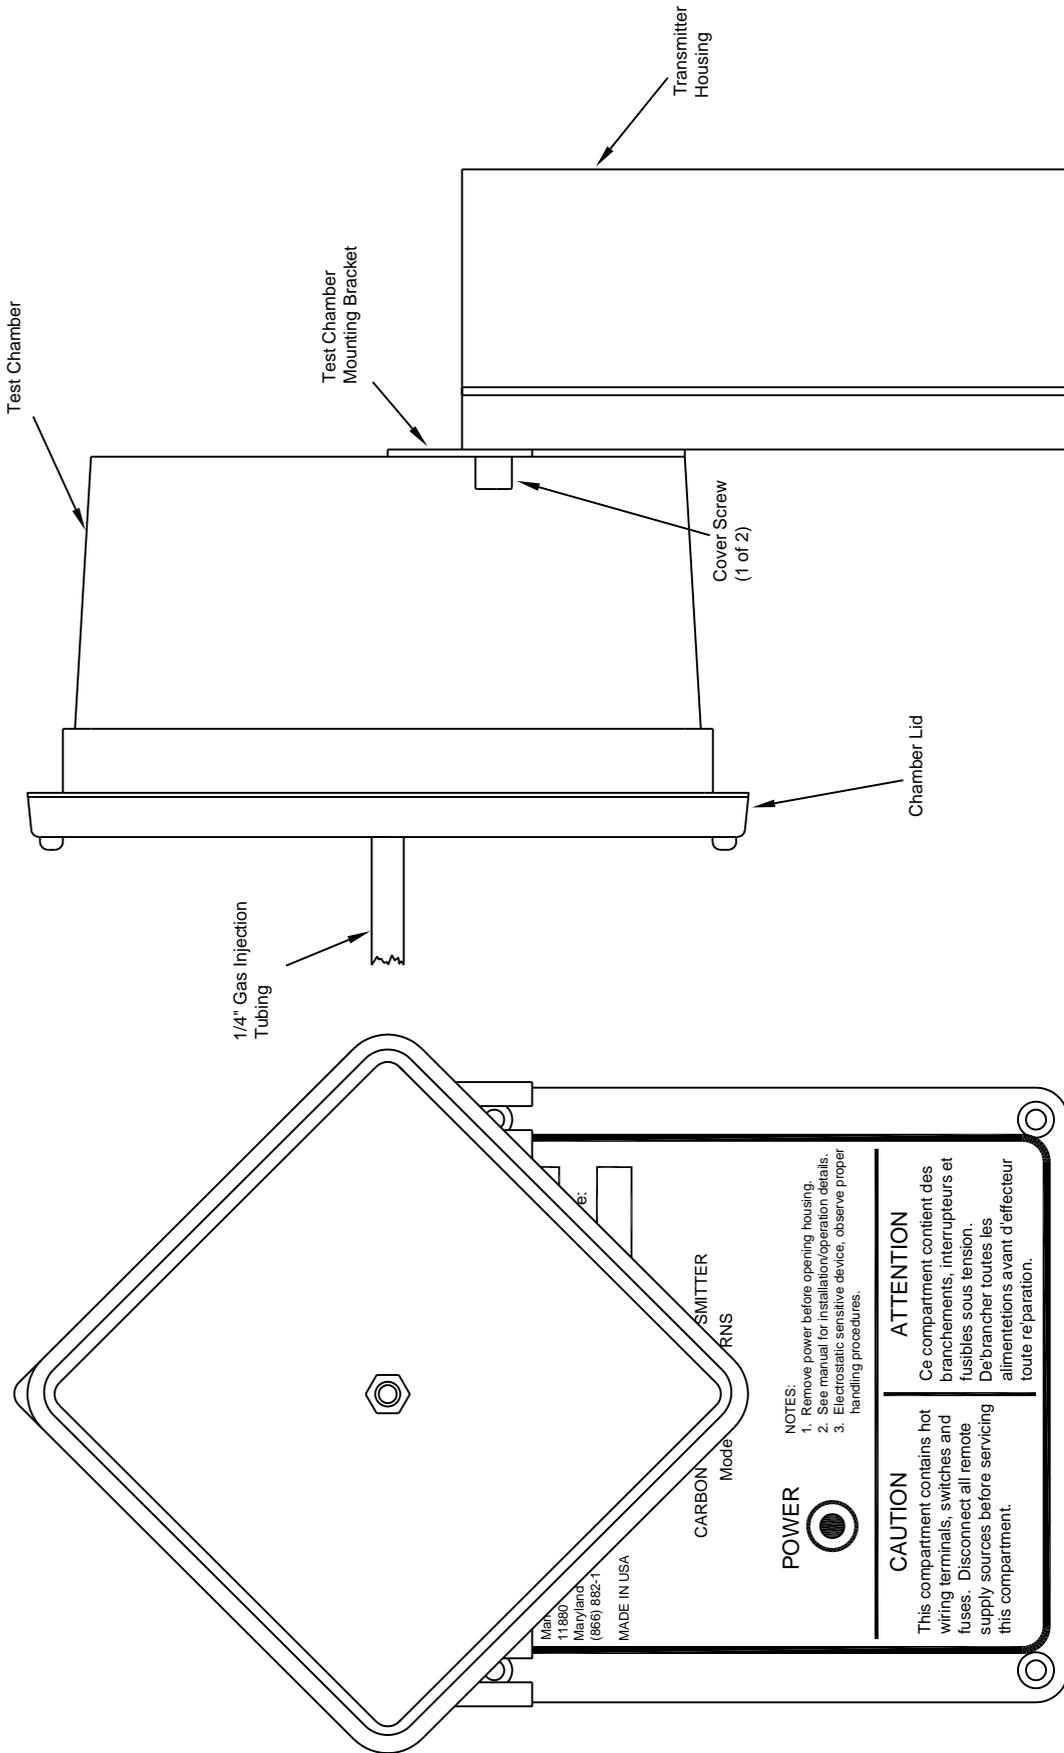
View of test gas chamber mounted on Brasch GSE transmitter.
